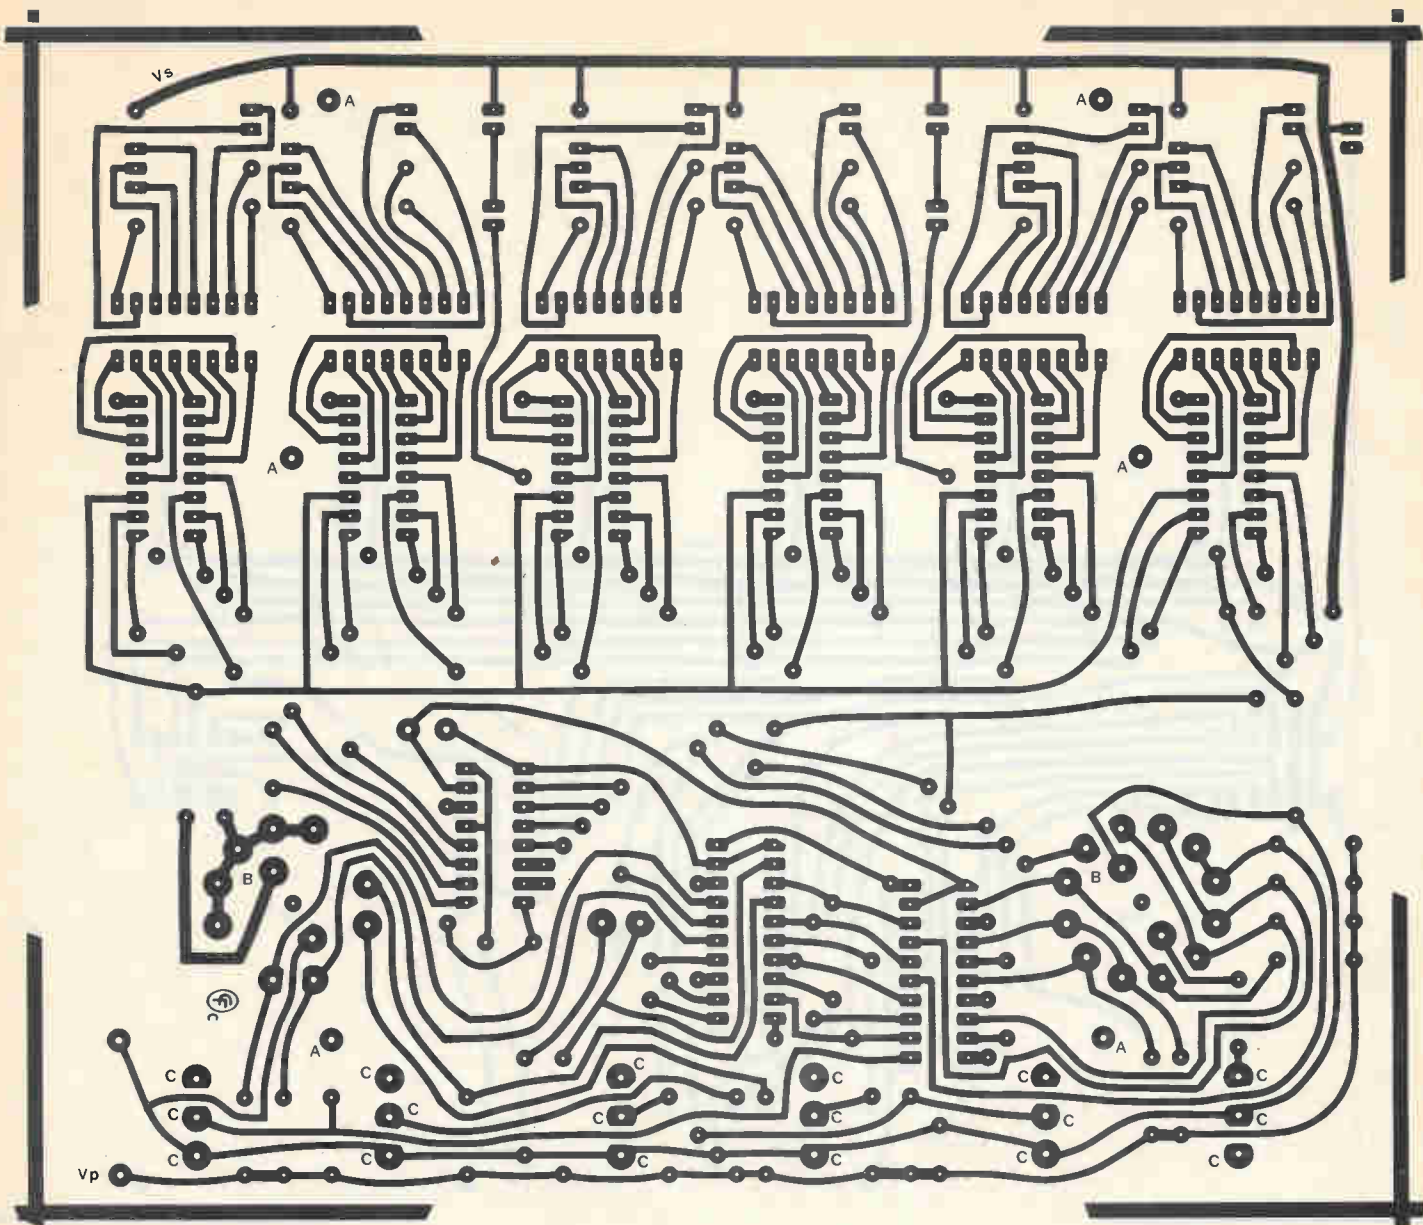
DISPLAY AND CONTROL printed-circuit board rear foil pattern shown same size.
